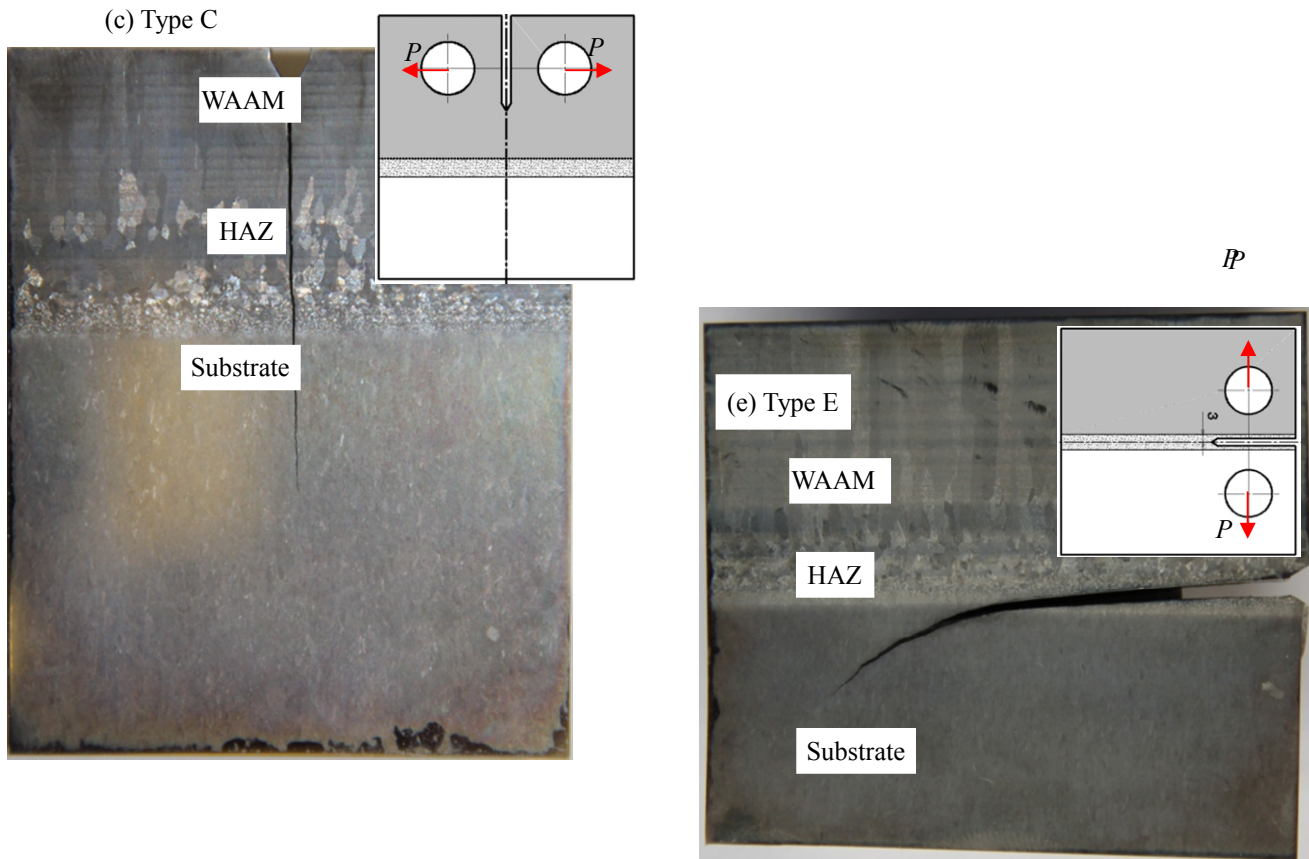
Macroscopic photographs showing fatigue crack trajectory in the interface of WAAM-substrate C(T) specimens.
